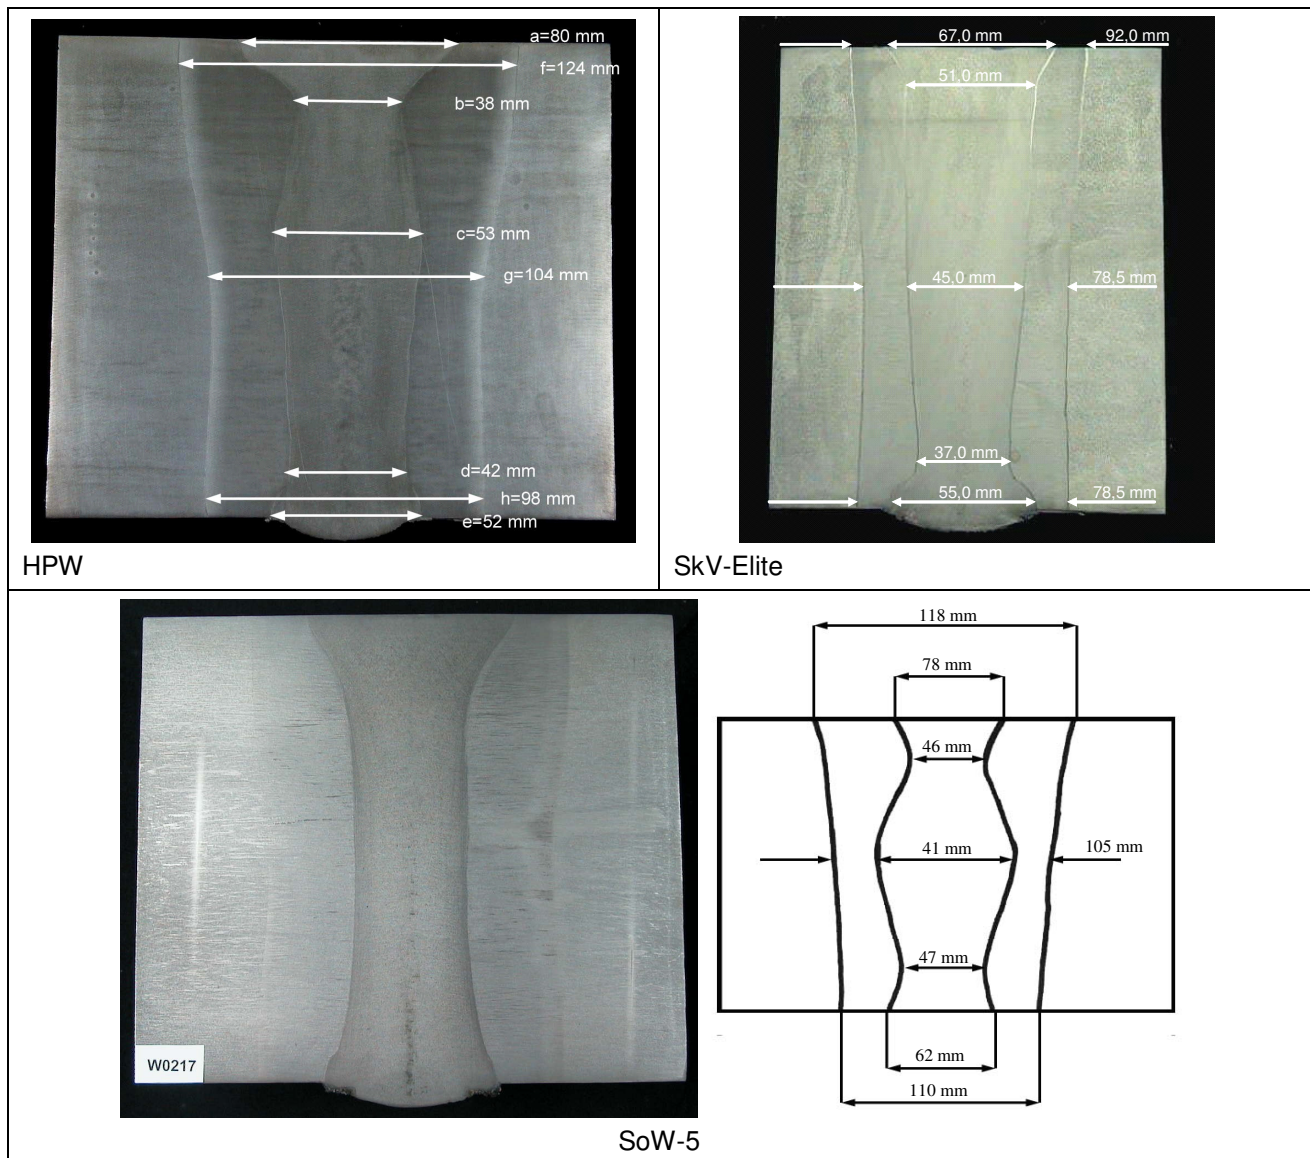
Shape and Geometry of Different Aluminothermic Welds
